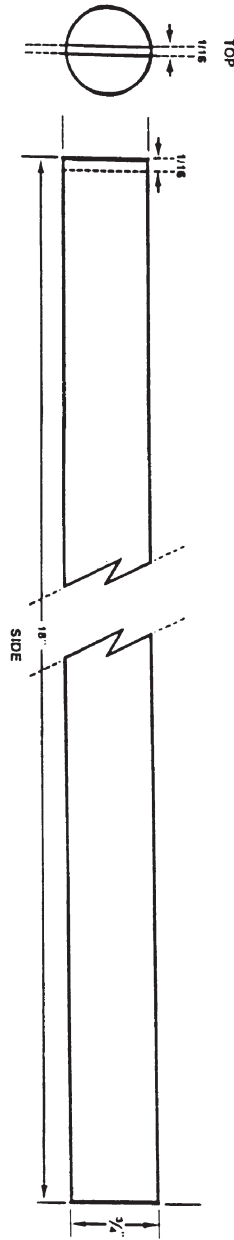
Hanger Bearing Tool Torque Reactor and Nutation Check
